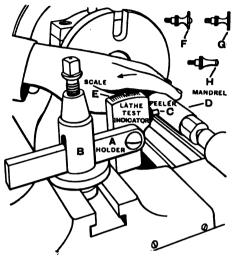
Testing the Truth of a Mandrel With a Lathe Test Indicator.
